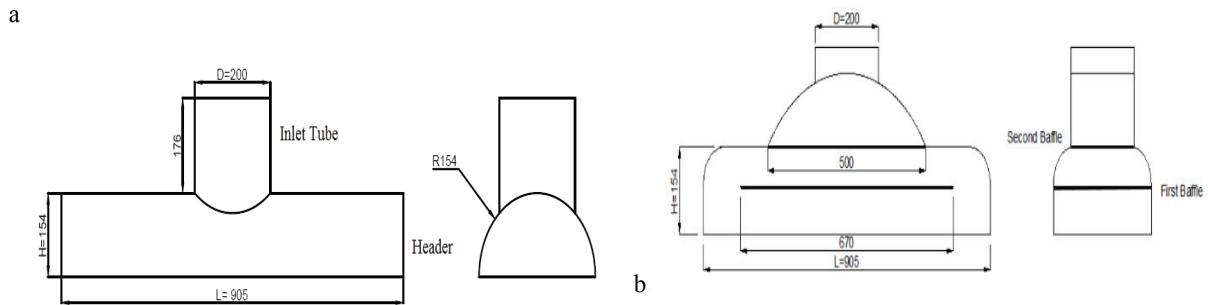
Schematic drawing of header configurations (a) Conventional header (b) Modified header
